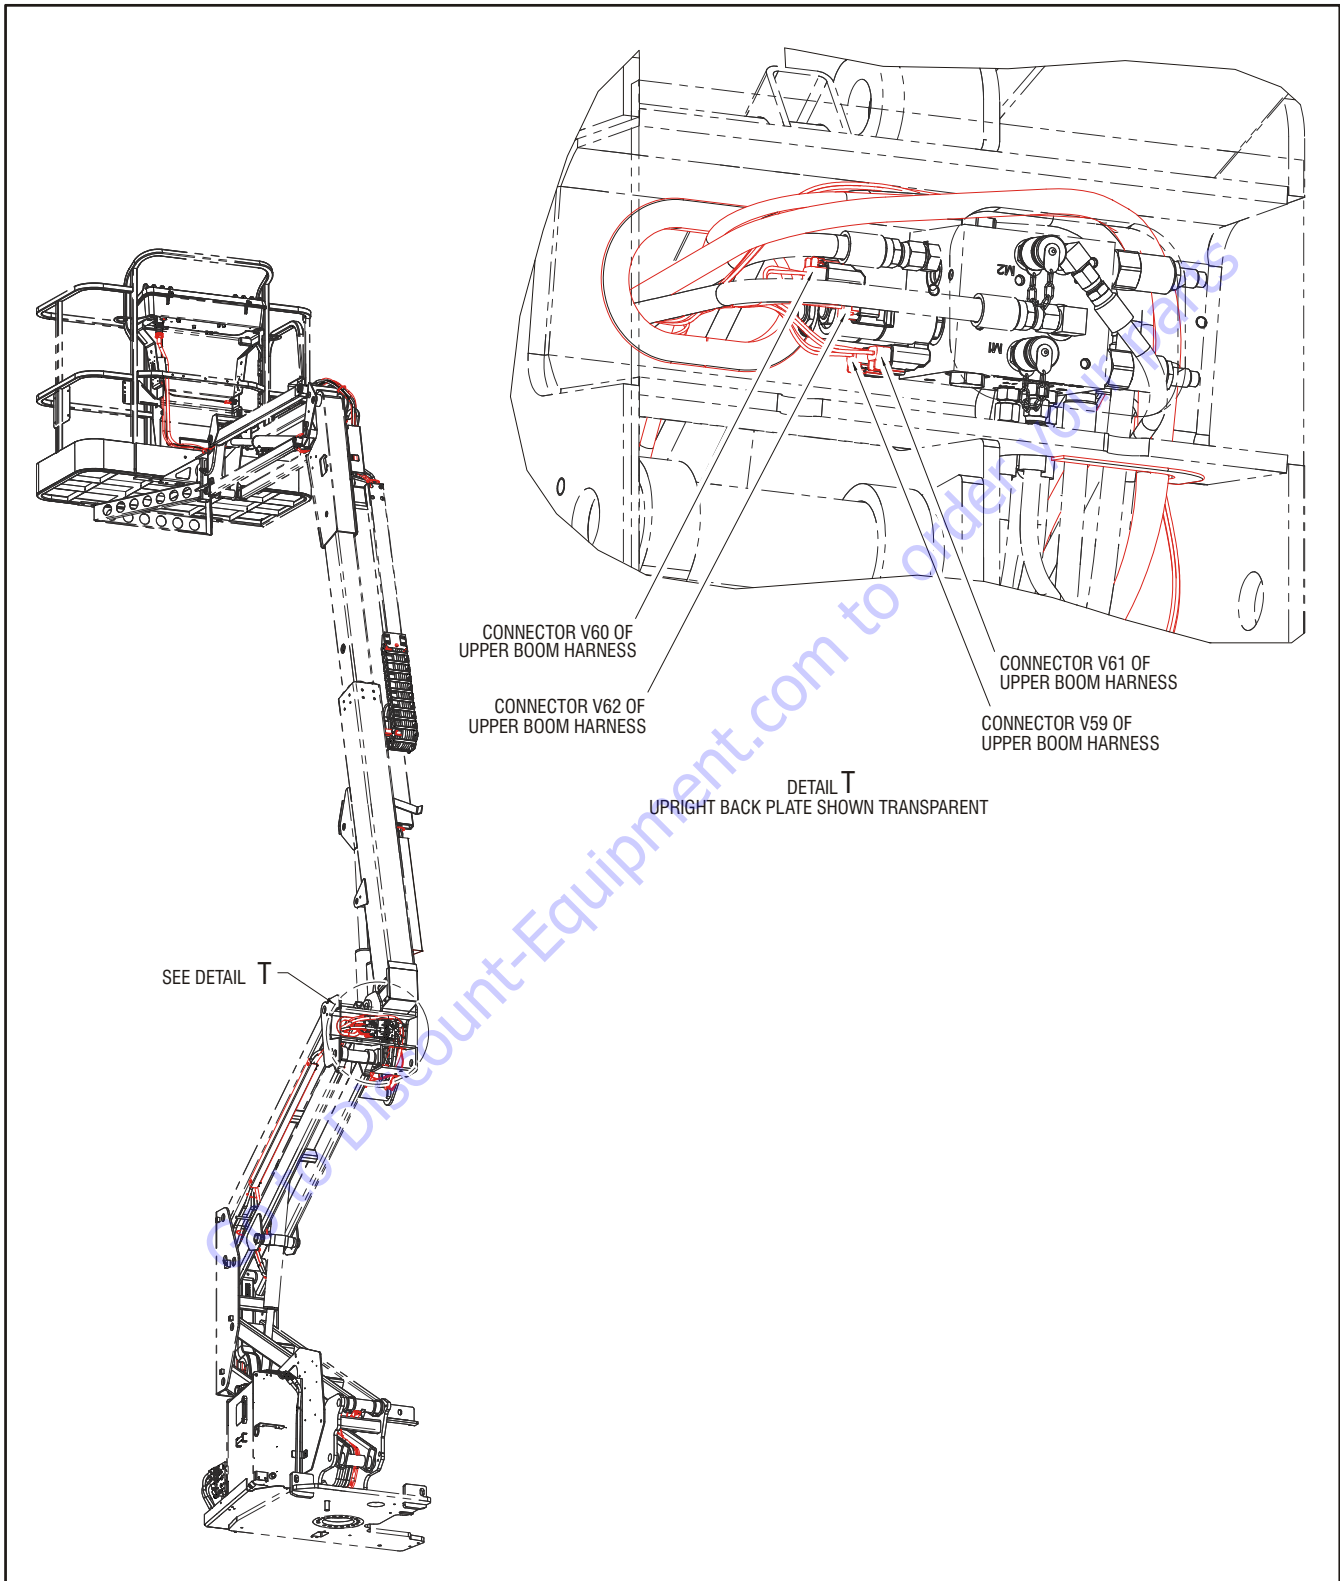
Cable Installation and Identification - Sheet 7 of 8
